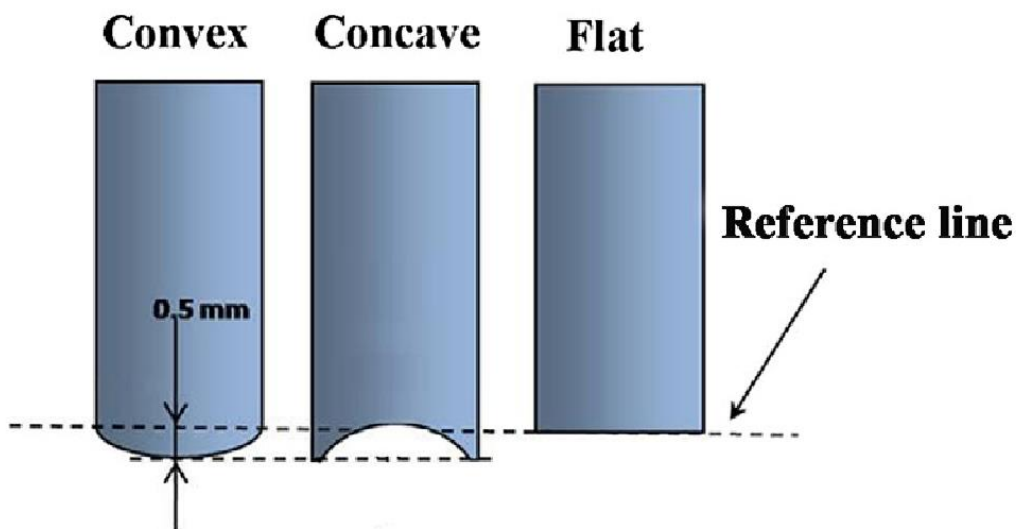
Schematic of FSSW with convex/concave/flat tool [41]
